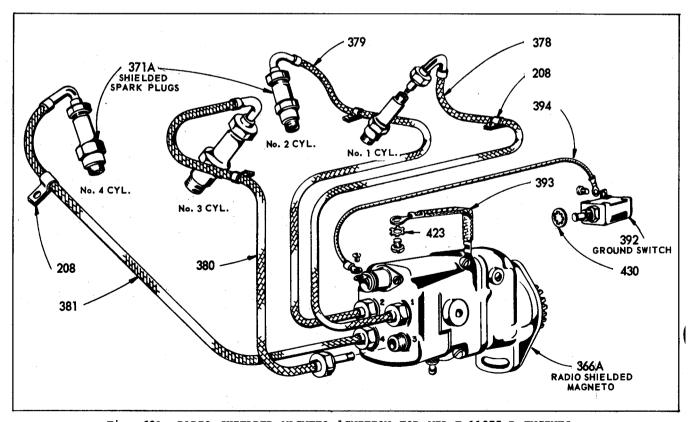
A, RADIO SHIELDED MAGNETO IGNITION FOR MIL-E-11275-B ENGINES
